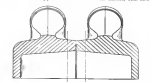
The two sections of the cylinder head machined and in position to be electrically butt welded
